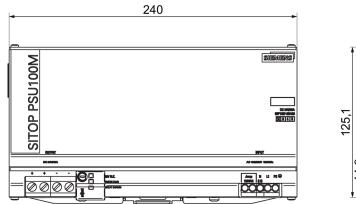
Dimension drawing for 6EP1336-3BA00
